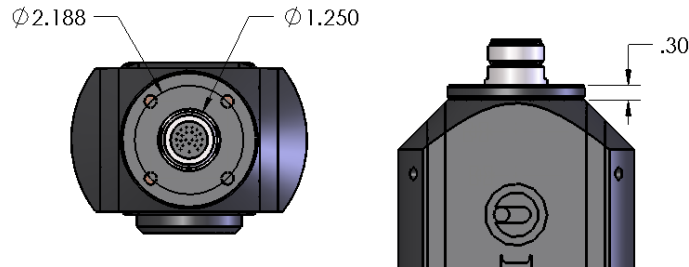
1/4-20 Mounting and Connector Clearance Dimensions
